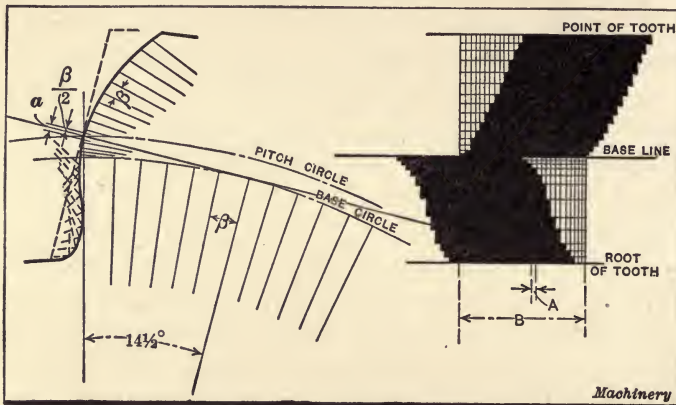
Relative Width and Position of Flats produced by Gear Hobbing Machines. A indicates Feed per Each Generating Tooth; B, Feed per Revolution of Blank
